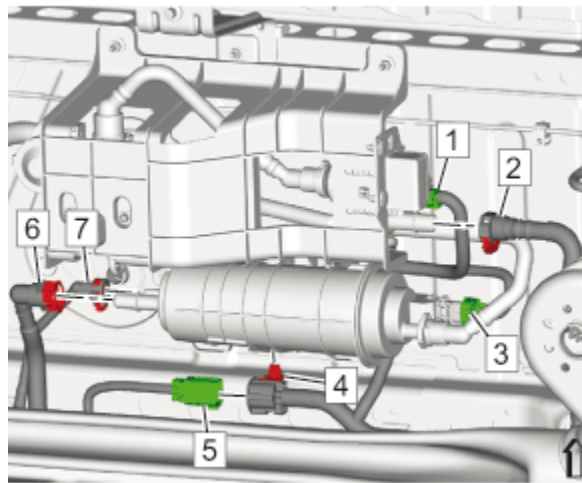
Electrical Connectors, Evaporative Emission Rear Hose, Evaporative Emission Pipe, Vacuum Leak Pump Filter Pipe And Retainer
